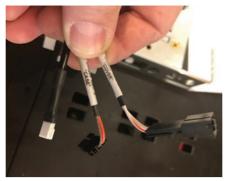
This image shows the three wires that come out of the bottom of the chassis.
